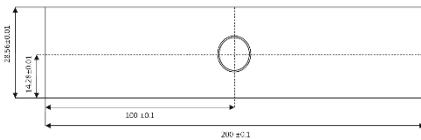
Geometry of fatigue specimens geometry. All dimensions in mm
